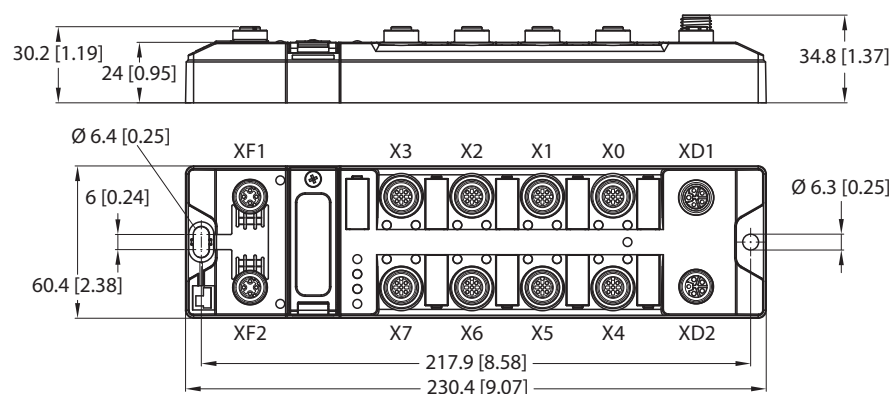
Dimensions TBEN-LL(H)-4RMC
